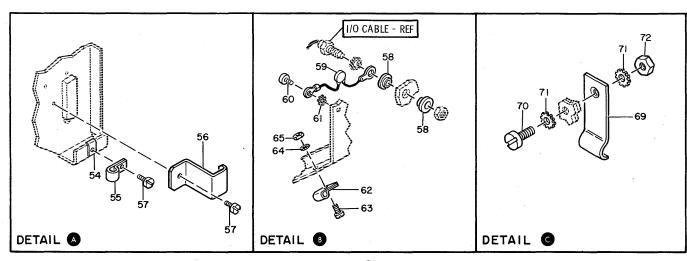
3284 M1/M2/M3 AND 3286 M1/M2 PRINTER CONTROLLER ASSEMBLY. SHEET 2 OF 2. INDEX NOS. 46-93.
